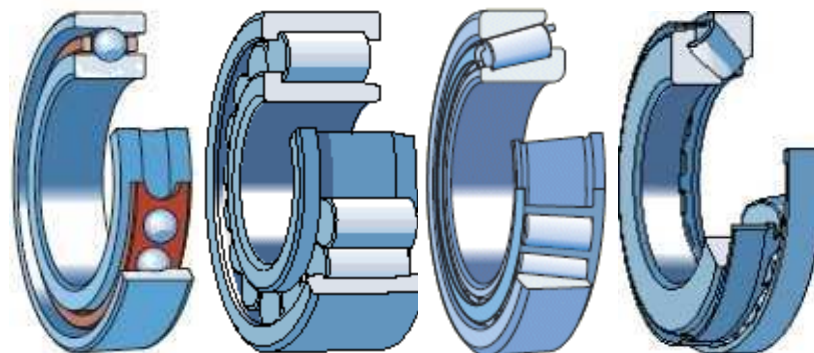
From left to right: angular contact bearing, cylindrical roller bearing, tapered roller bearing and spherical roller thrust bearing (source: SKF)
